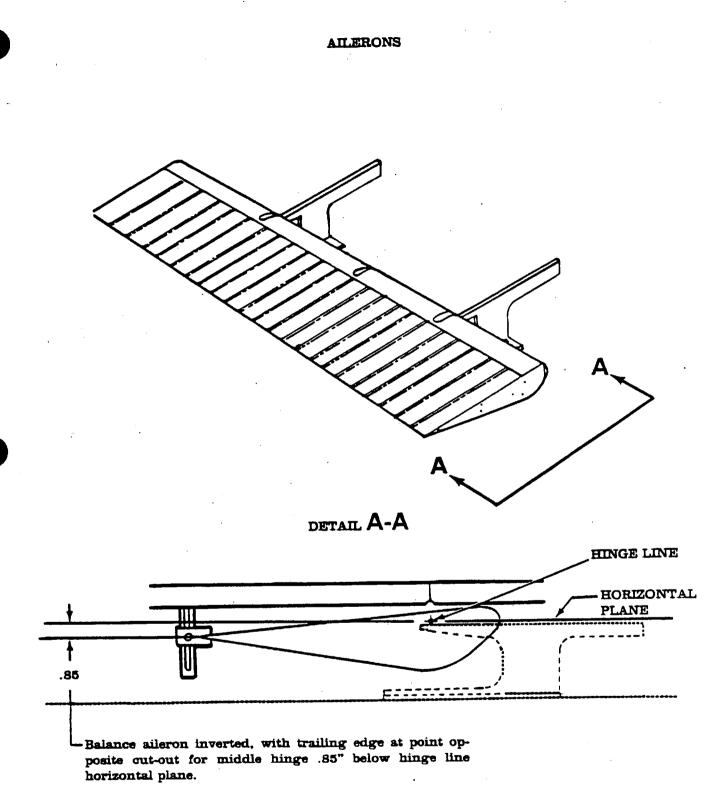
Control Surface Balancing (Sheet 3 of 6)
